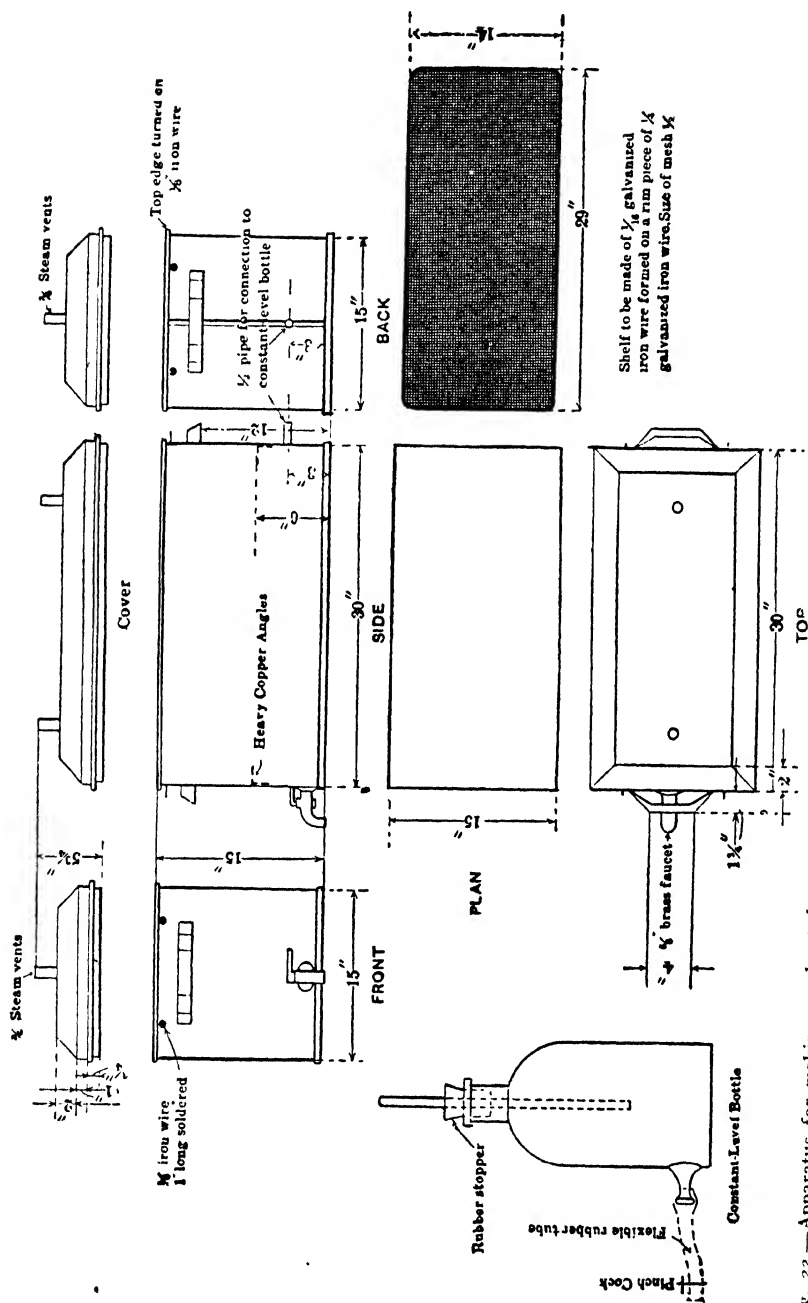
Apparatus for making accelerated test for soundness of cement. To be made of sheet copper weighing 22 ounces per square foot, tinned inside. All seams to be lapped where possible. Hard solder only to be used.
